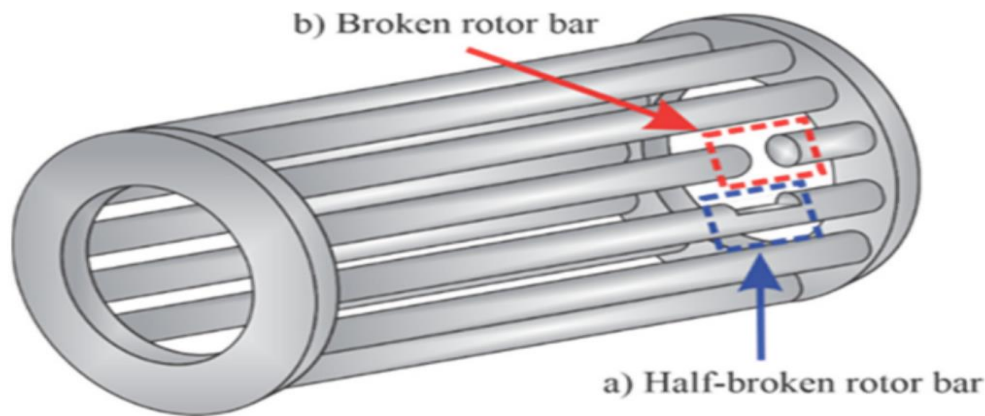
Broken rotor Bar: a) half- broken rotor bar b) single broken rotor bar
